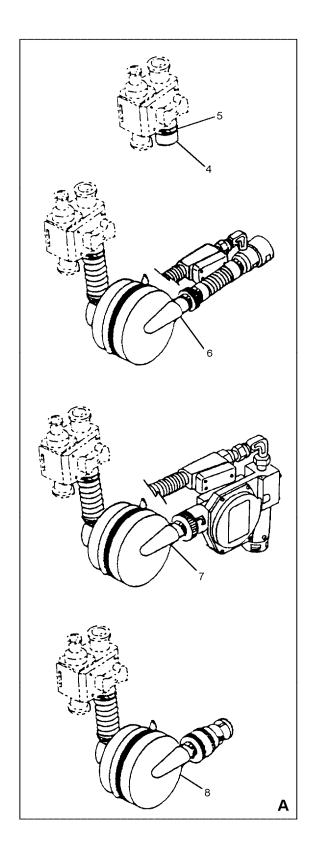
A/P22P-14(V) Series Respirator Assemblies (Major Components Identified) (Sheet 2 of 2)
